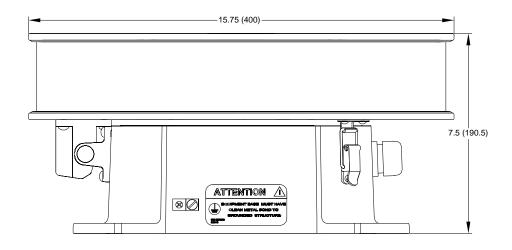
FTC 2301-2 Controller Mounting and Outline
